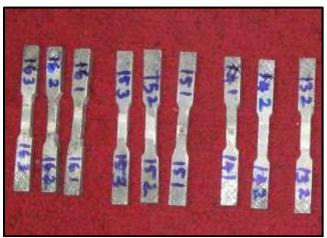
Fabricated tensile test samples according to ASTM E8/E8 M-11 standard.
